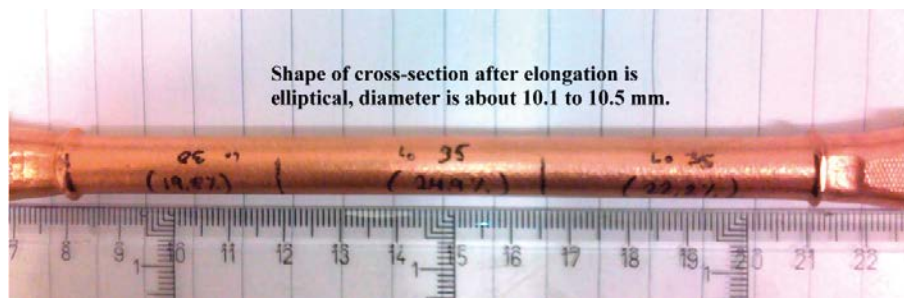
Cylindrical bar specimens after 24% cold work to be used for manufacturing of cylindrical, double notched creep specimens.
